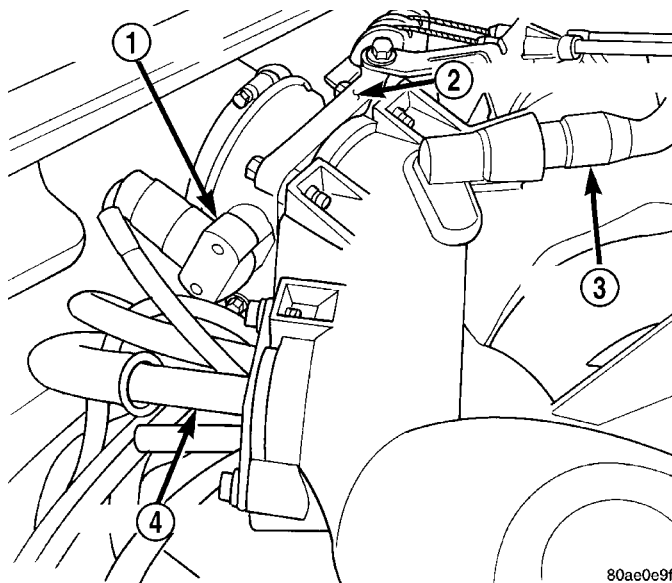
THROTTLE POSITION SENSOR 2.7L ENGINE
